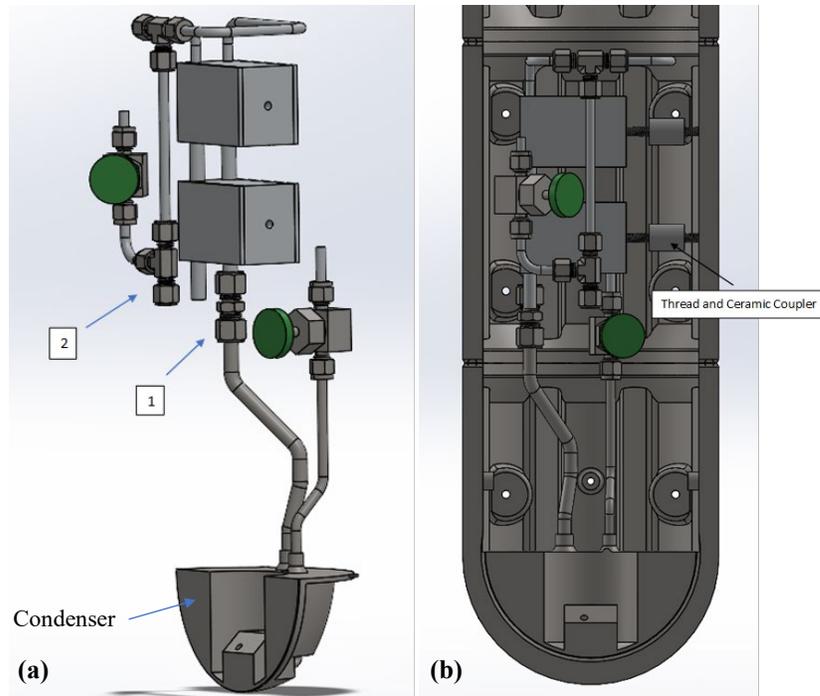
(a) Condenser and evaporator assembly, (b) Condenser and evaporator assembly fit into probe shell
